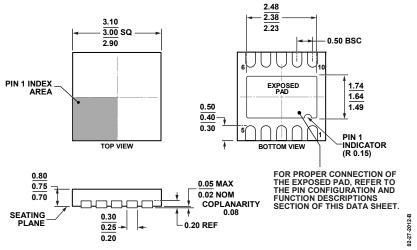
10-Lead Lead Frame Chip Scale Package [LFCSP\_WD] 3 mm × 3 mm Body, Very Very Thin, Dual Lead (CP-10-9) Dimensions shown in millimeters
